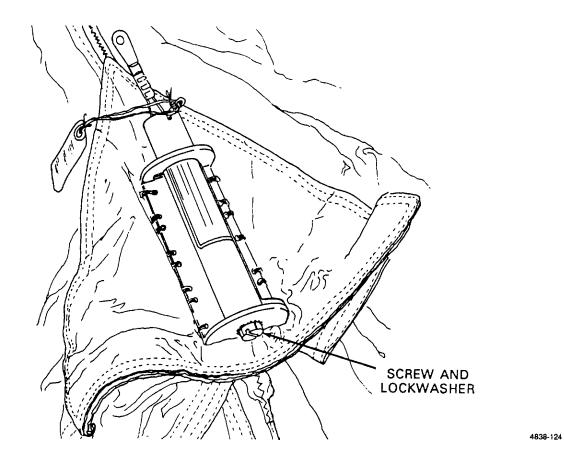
Reefing Line Cutter Mounted in Cutter Bracket.
